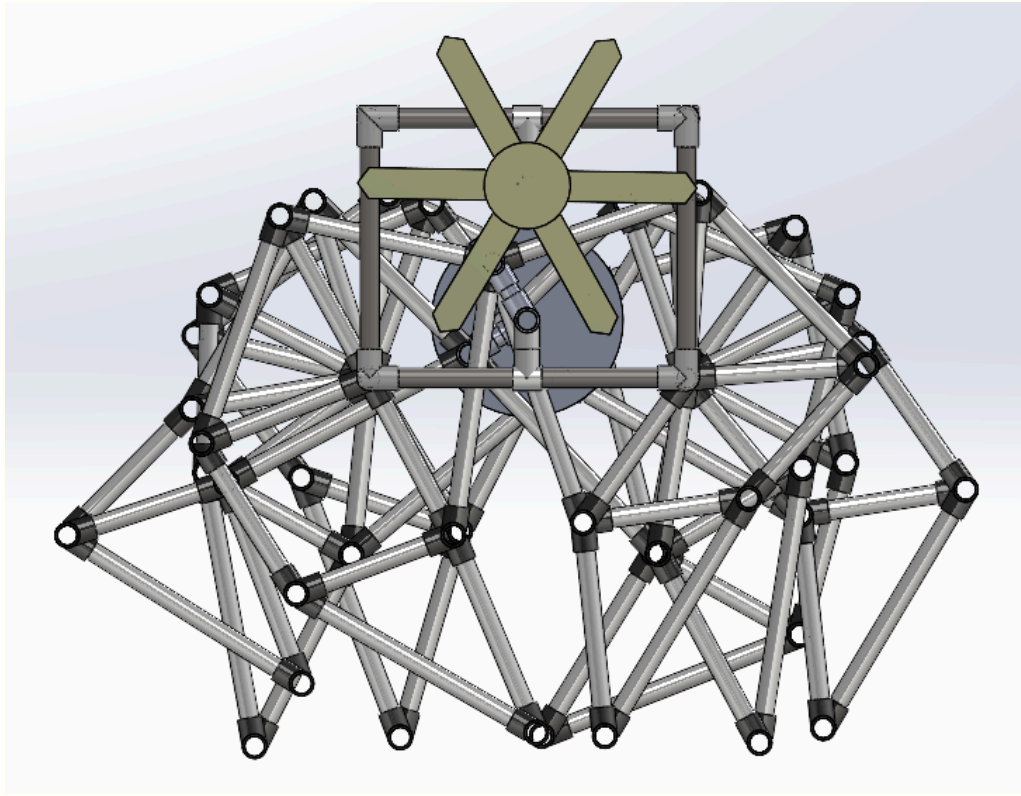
Solidworks Full Assembly Model (Right-Plane View)
